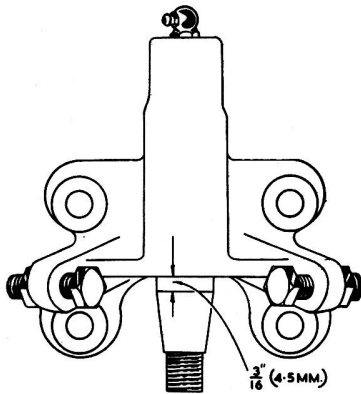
Setting dimension for the steering idler fulcrum pin
